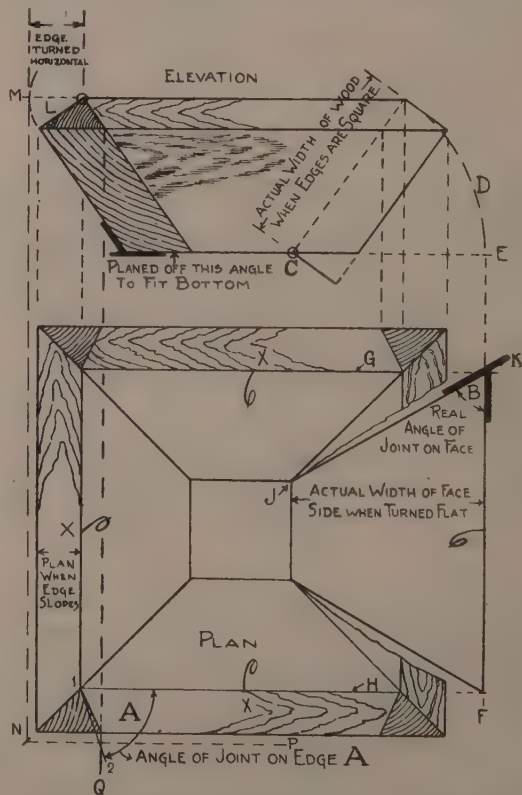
DETAILED ELEVATION AND PLAN OF BOX WITH SPLAYED SIDES.
